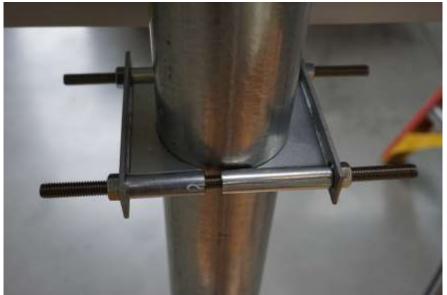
Inner components of Figure 12 assembled onto tower. Complete removal of the outer components is not necessary.
